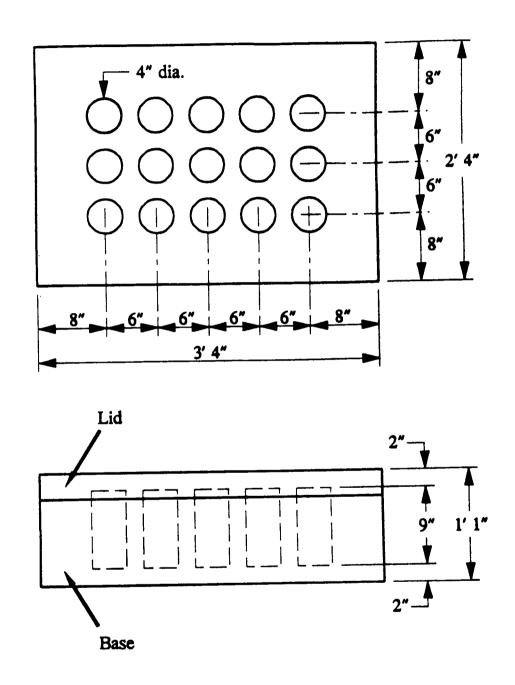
Styrofoam insulation block used for curing concrete cylinders at Arkansas
